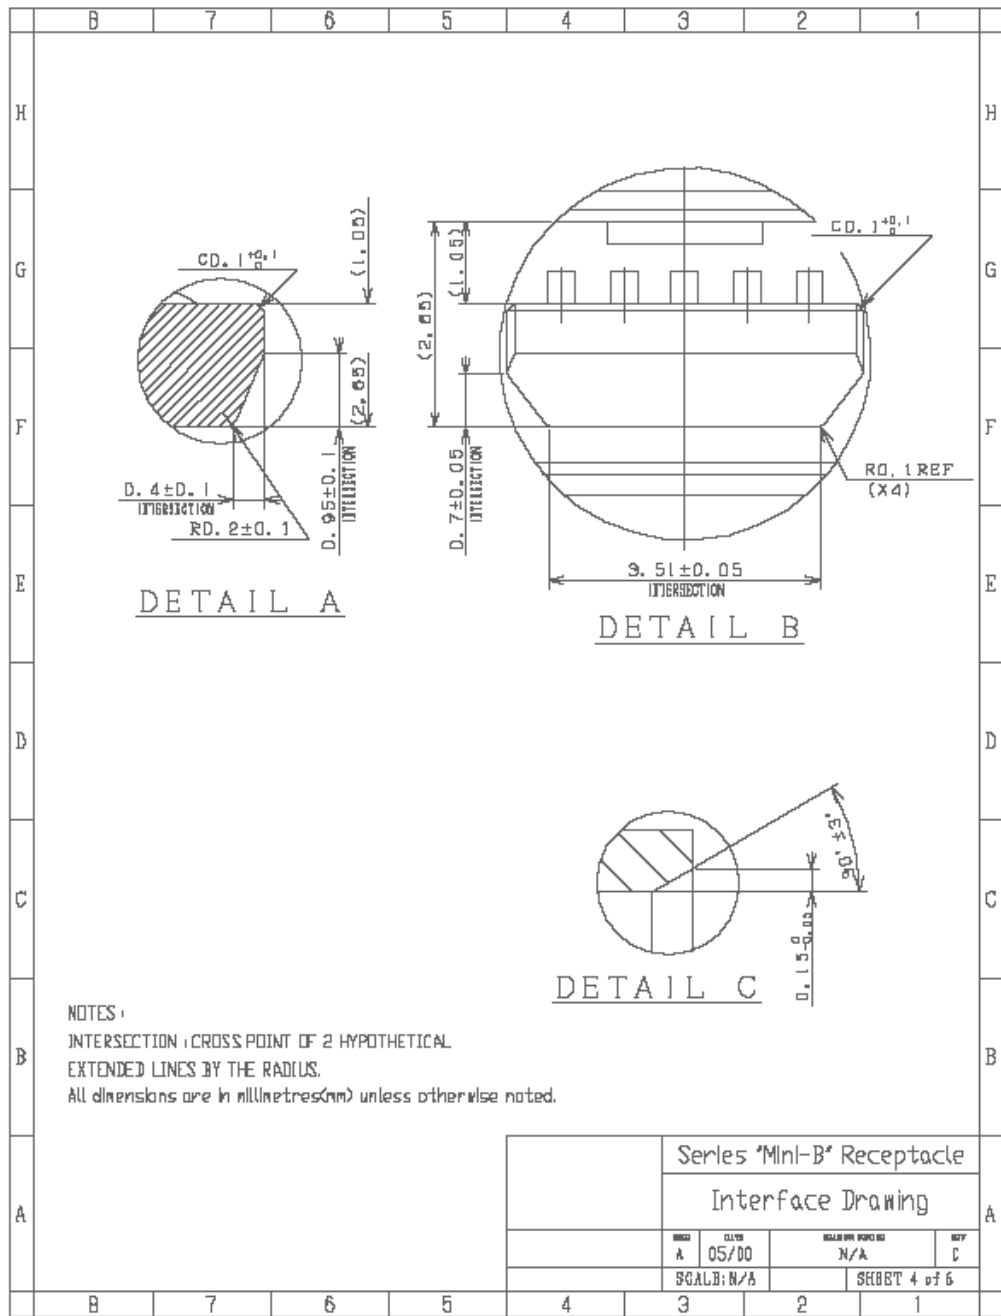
USB Series "Mini-B" Receptacle Interface Drawing (Detail)
